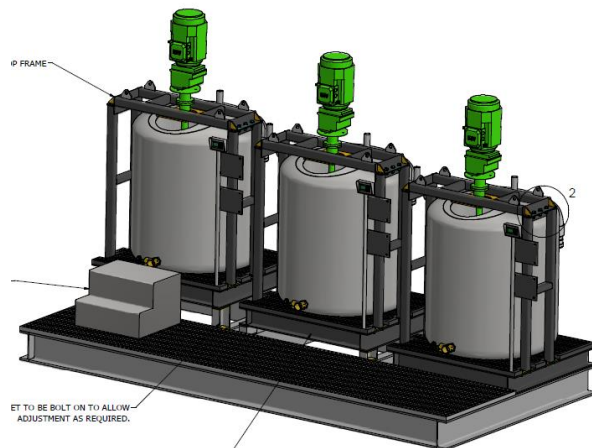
CAD drawing of Mixer Stand with Reactor Tanks.
